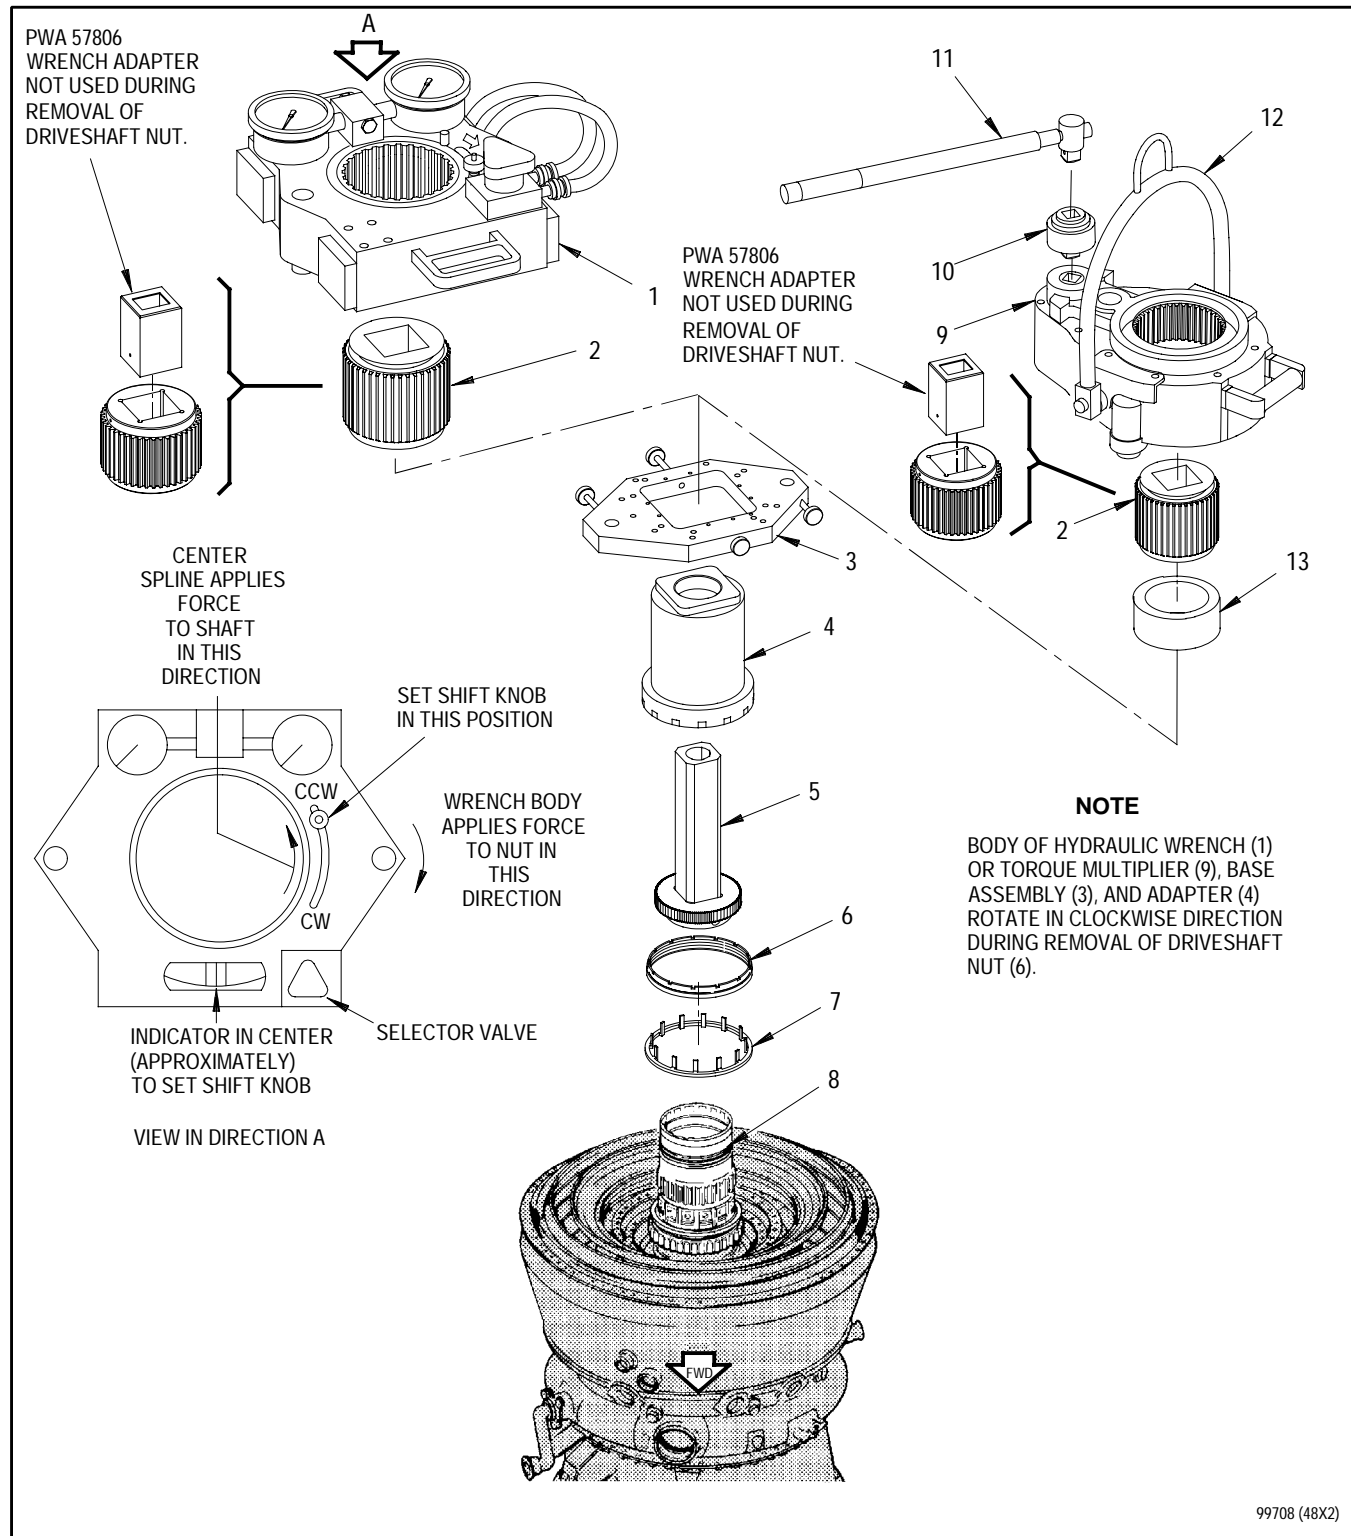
No. 4 Bearing Retaining Nut - Removal Tooling
